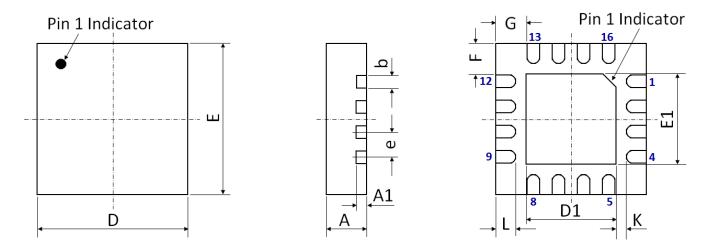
Device Package Drawing (All dimensions are in mm)
